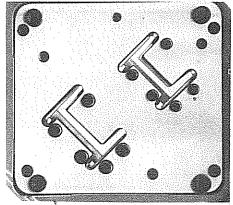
Combined sectional steel blade of PME type for U steel sections
